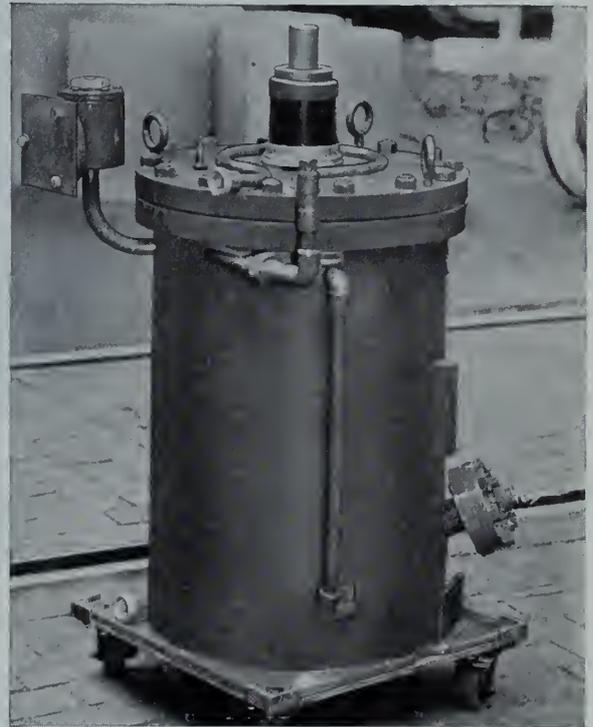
Shop assembly of ignitron tank ready for mounting in frame.
